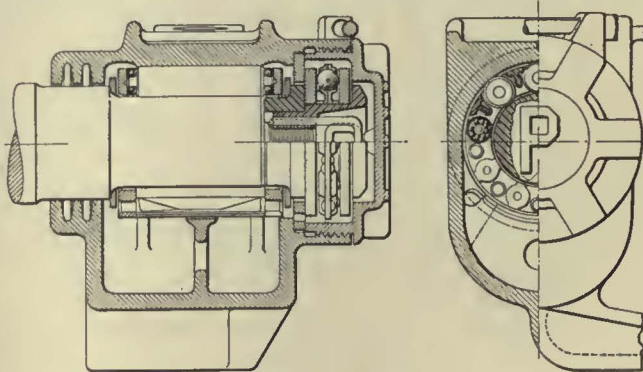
SECTIONAL VIEW OF PERKINS ROLLER BEARING
